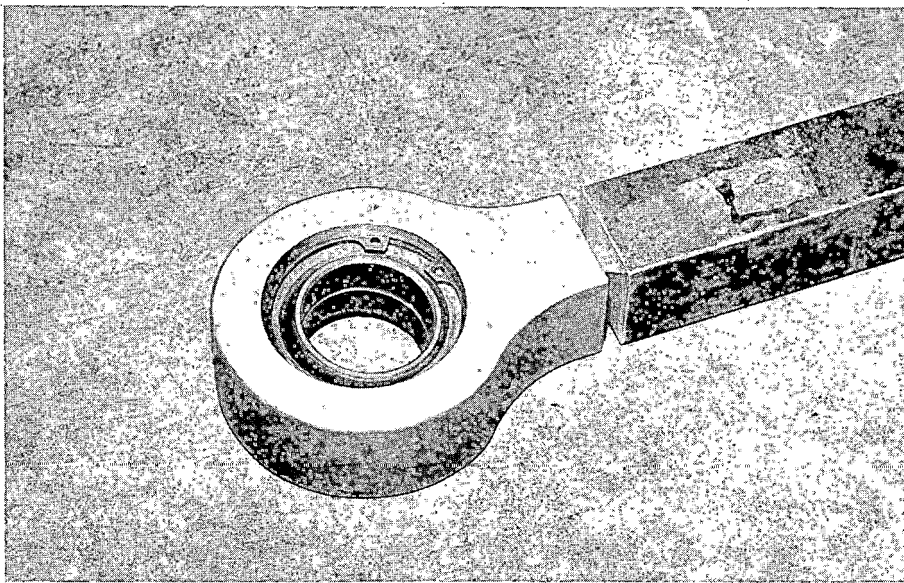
CLOSE UP OF NEW CROSS-LINK ROD-END BEARING.
